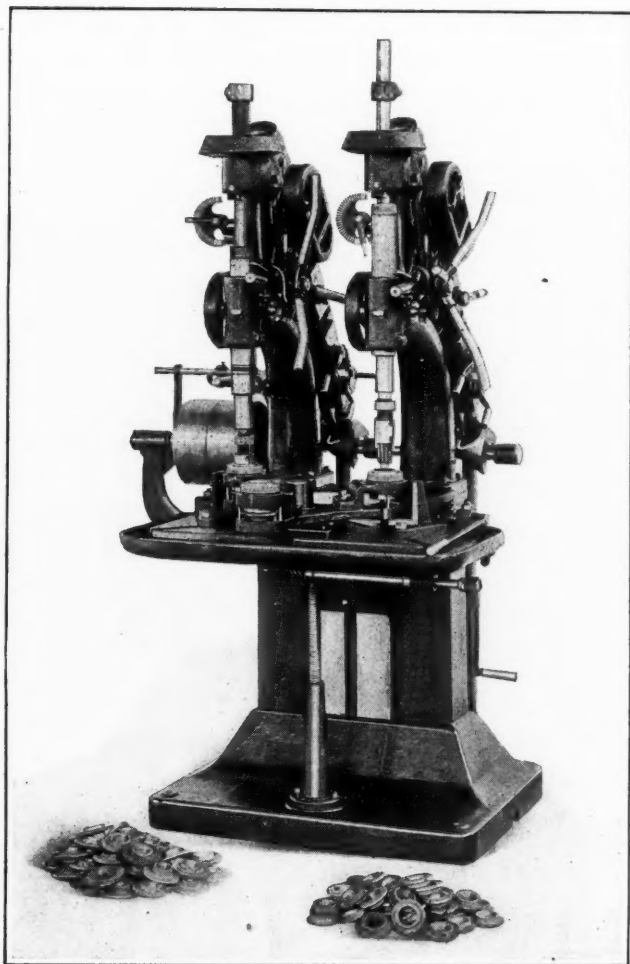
Barnes Drill Co.'s Two-spindle 20-inch All-gear Drilled equipped with Rotary Fixture
